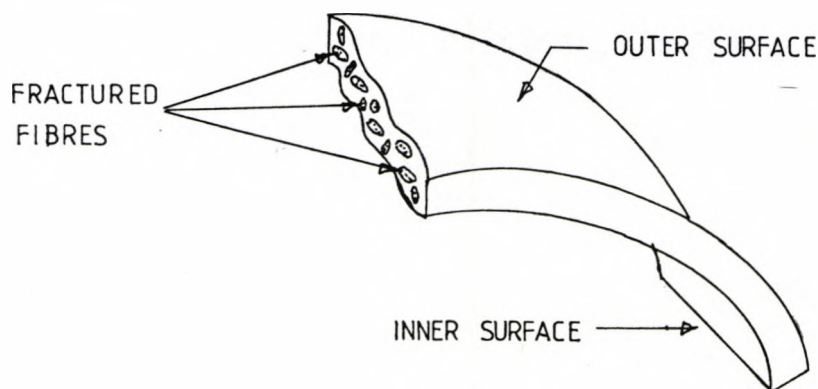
Section of the Specimen which Contains the Fractured Fibres.
